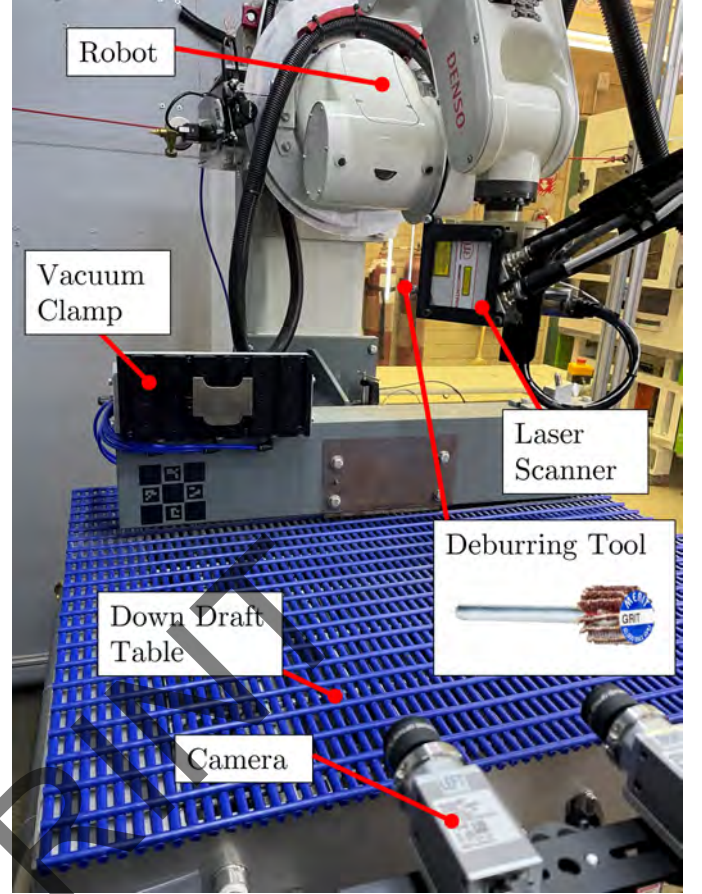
Experimental setup used for all tests indicating the robot, the vacuum clamp, camera, and laser scanner locations.
